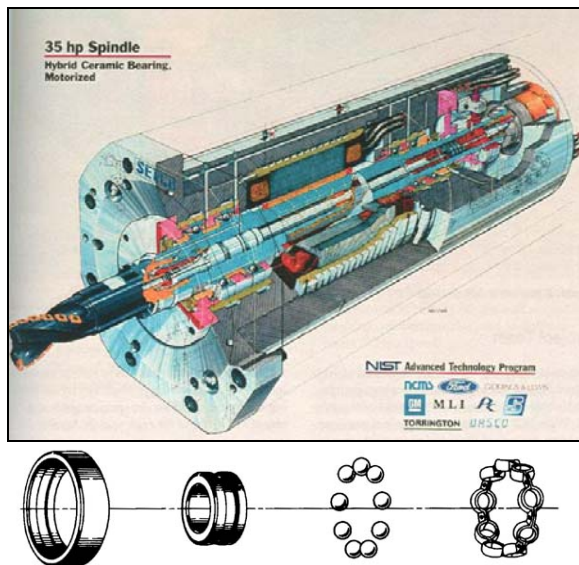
Top: Diagram of the prototype high-speed 35-hp spindle. The assembly measures approximately 25 cm in diameter and 69 cm in length. Bottom: Diagram of the ceramic ball bearings.
